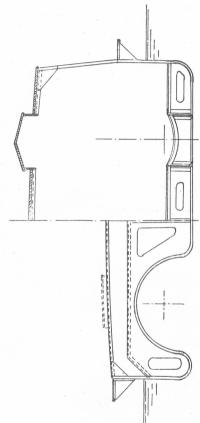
Midship Section and After Section Tunnel Screw Fire Boat.
